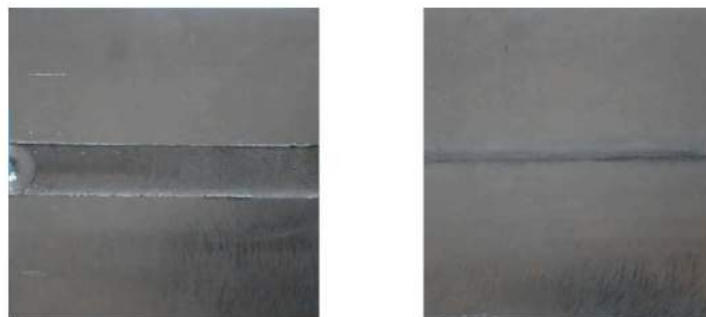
Photographic presentation face and obverse of welded joint
